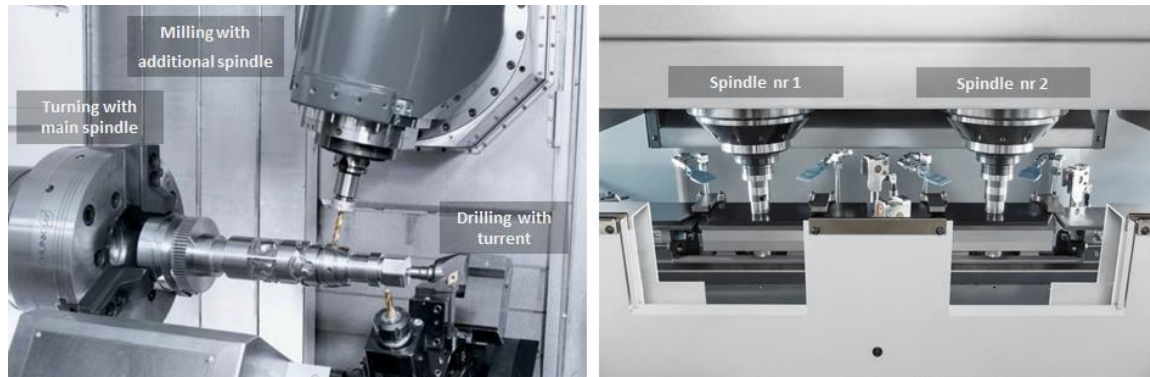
Multitasking machine tool: Milling/turning lathe CTX TC and VSC twin 250
